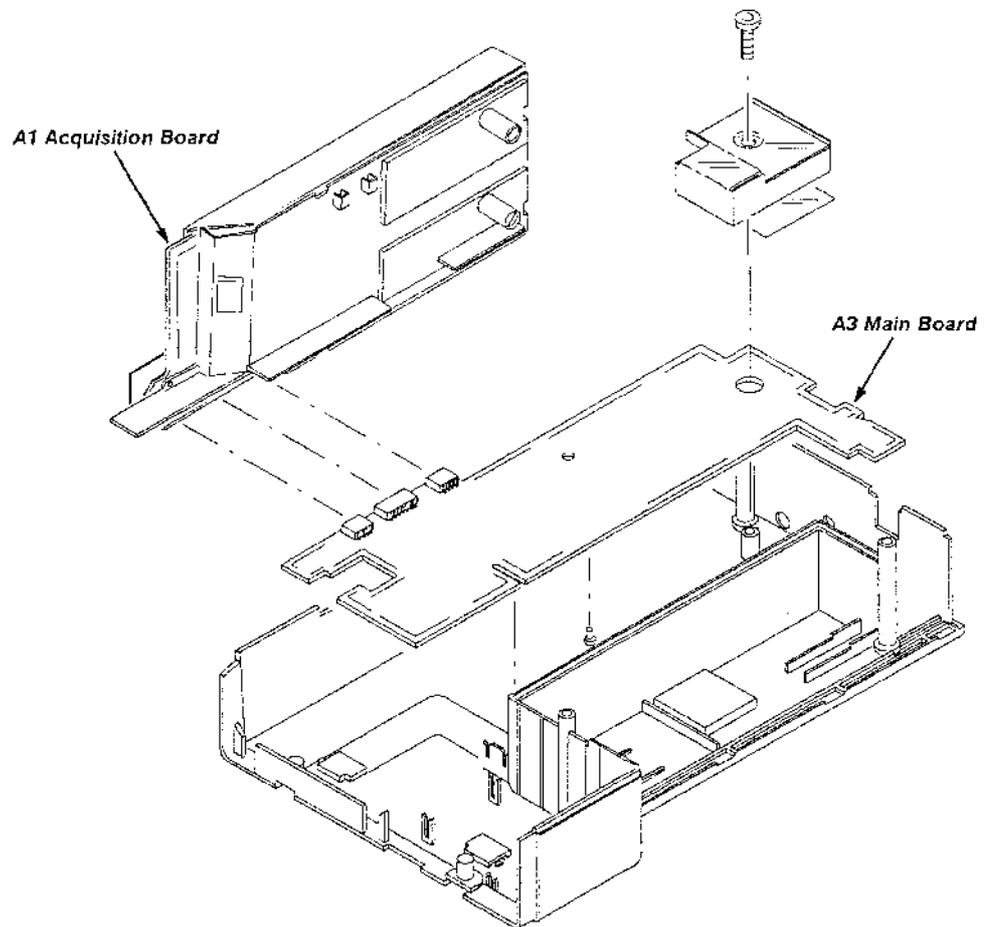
Removing the Main and Acquisition Boards as an Assembly
